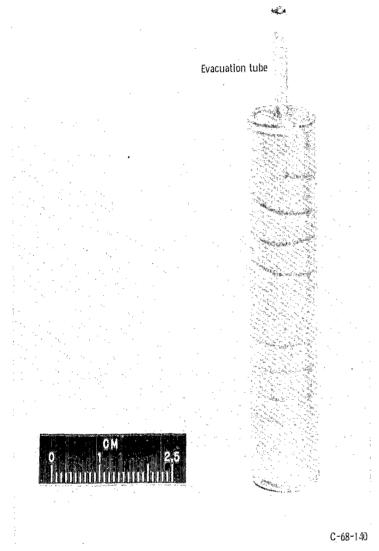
AISI Type 304 stainless-steel can containing TD-nickel weldments after exposure to hot-isostatic-pressure (HIP) welding cycle. (The imprint of the wire on the can and the flattening of the evacuation tube attest to the fact that HIP welding of the specimens was achieved.)
